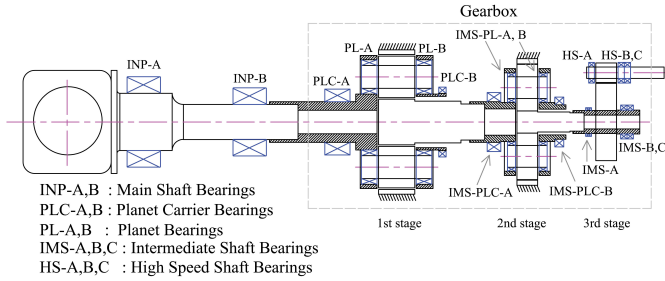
5-MW REFERENCE GEARBOX LAYOUT [8].
